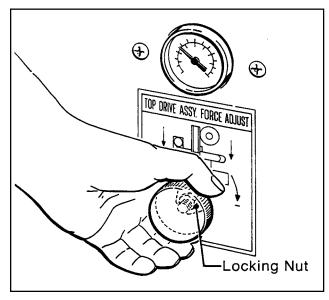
Air Regulator/Gauge, Top Drive Assembly
